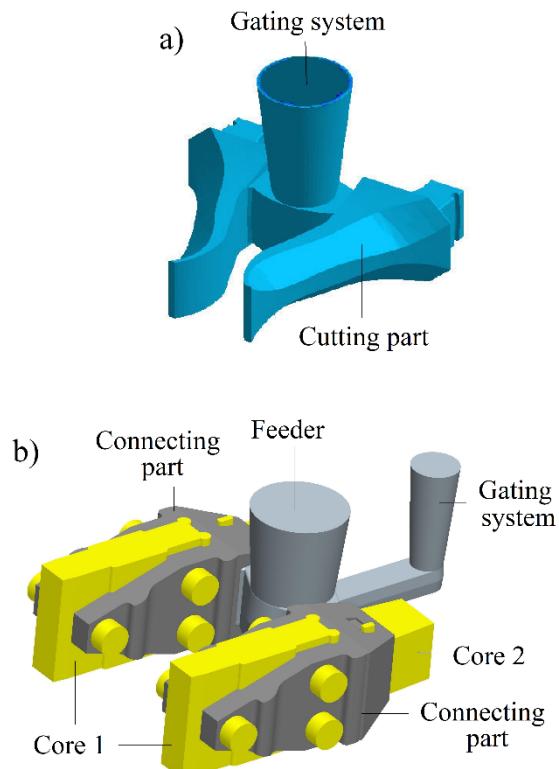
CAD components of the two-piece tooth: a) cutting portion, b) holder
